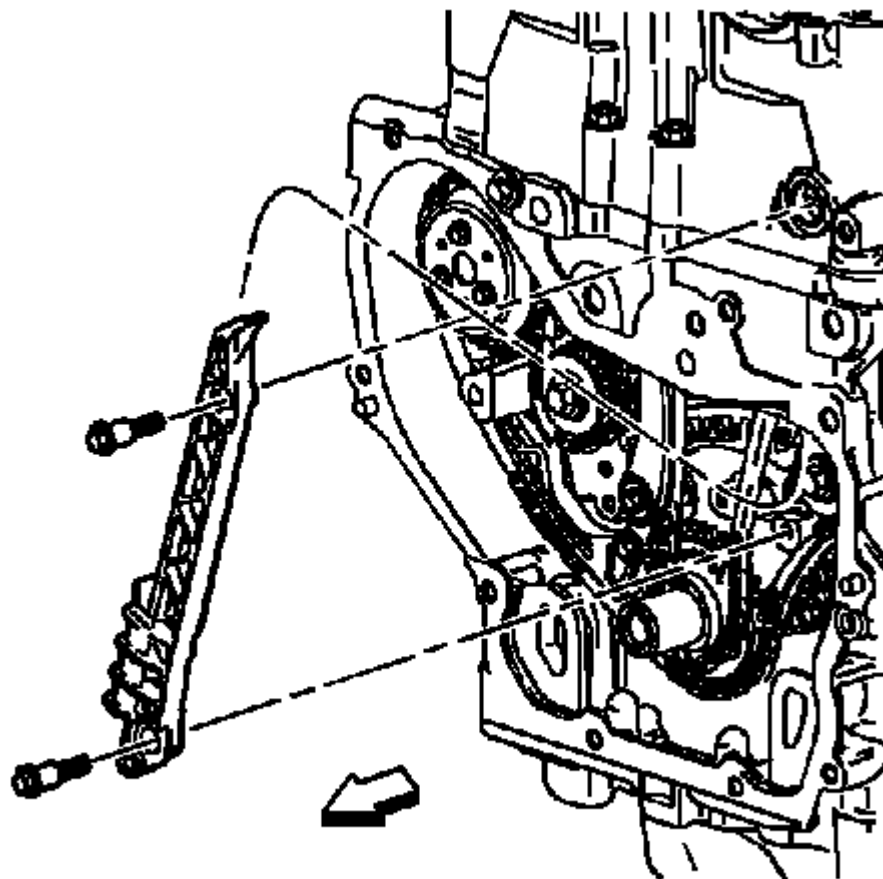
Identifying Cam Actuator, Camshaft & Chain
